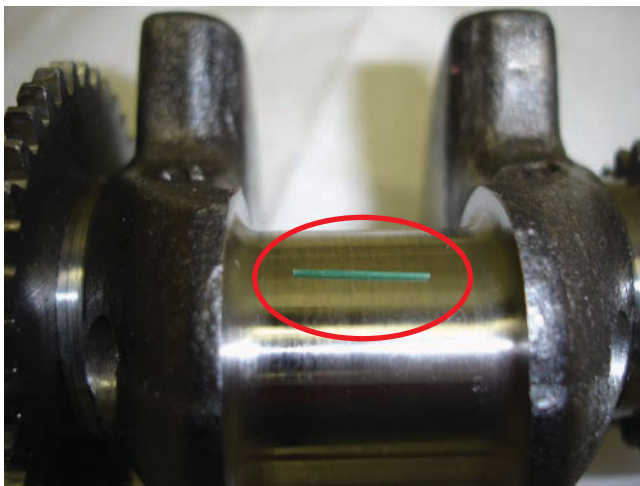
A small piece of Plastigage placed on the bearing surface to check the clearance between the connecting rod and crankshaft-bearing surface.
